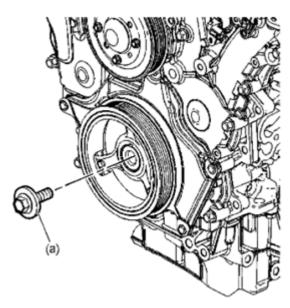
Identifying Crankshaft Pulley Bolt Courtesy of SUZUKI OF AMERICA CORP.
